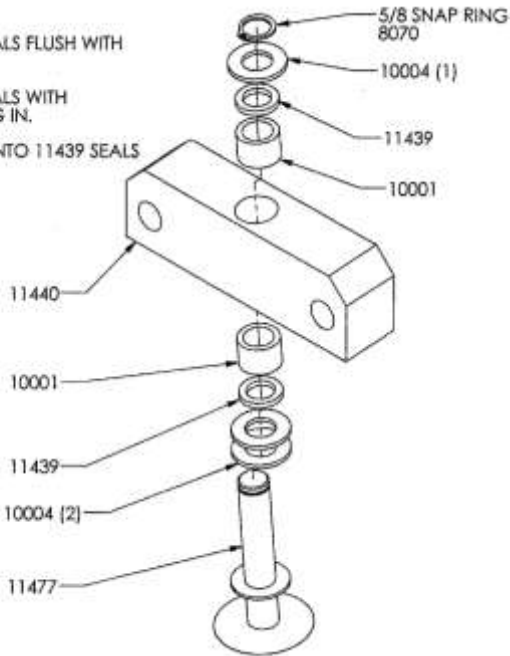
BOTTOM CUTTING WHEEL ASSY
